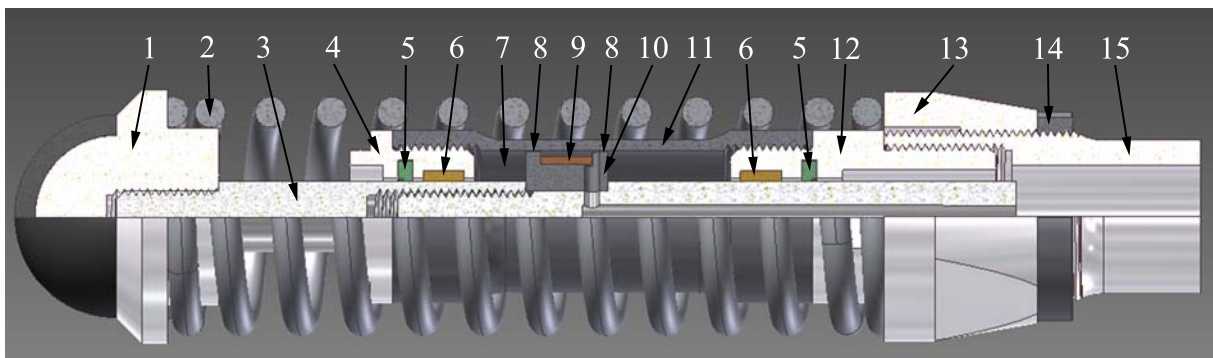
, CAD cross-section view of the MR foot. Numbered components: (1) rubber coated foot tip, (2) spring, (3) piston shaft, (4) lower end cap, (5) seal, (6) sliding bushing, (7) MR fluid, (8) MR fluid gap, (9) solenoid, (10) piston, (11) cylinder, (12) upper end
